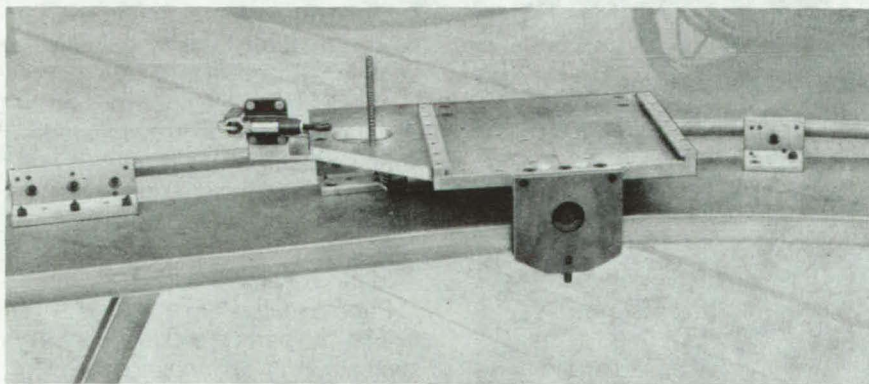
The Carriage Rides the Track to any location or position, including overhead. The electric motor that drives the carriage is not in place in this photo, but the gears can be glimpsed below the left end of the platform. Grooves for mounting tools on the carriage platform are seen, as well as the brackets for adjusting the guide rail along the track.
